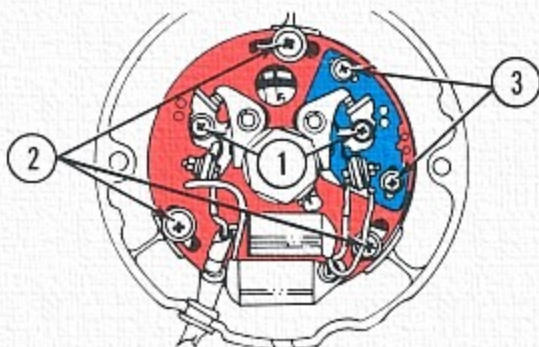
Contact Point Assembly — Honda Four Cylinder Air-Cooled Engine
